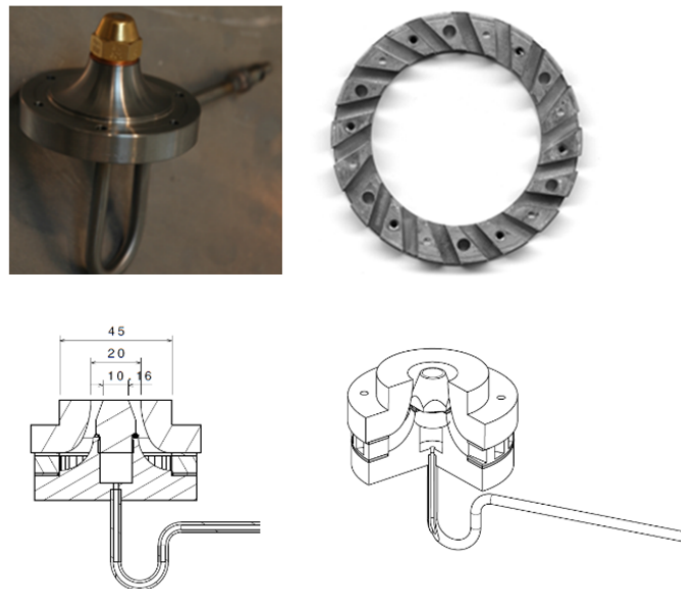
Injection system. Top-left: atomiser mounted on the fuel line. Top-right: air swirler. Bottom: drawing of the complete system.
